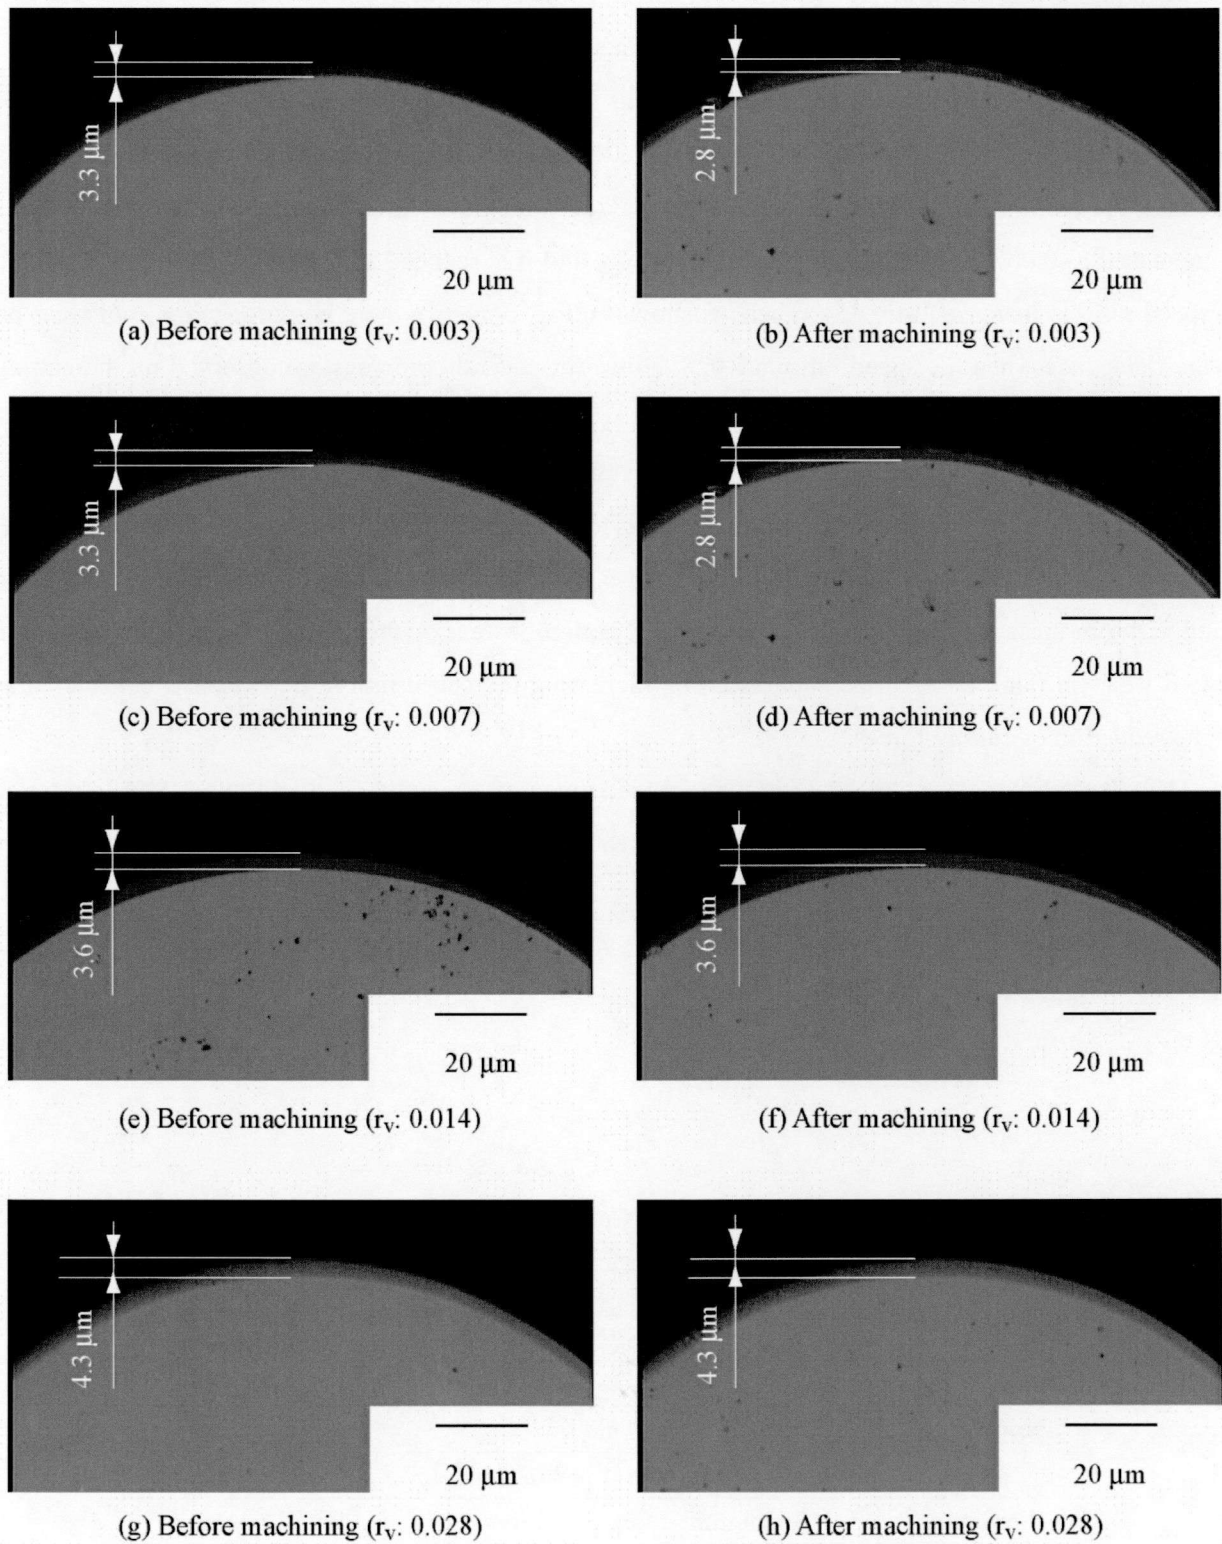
Rake face of tool used in the machining with each speed ratio
